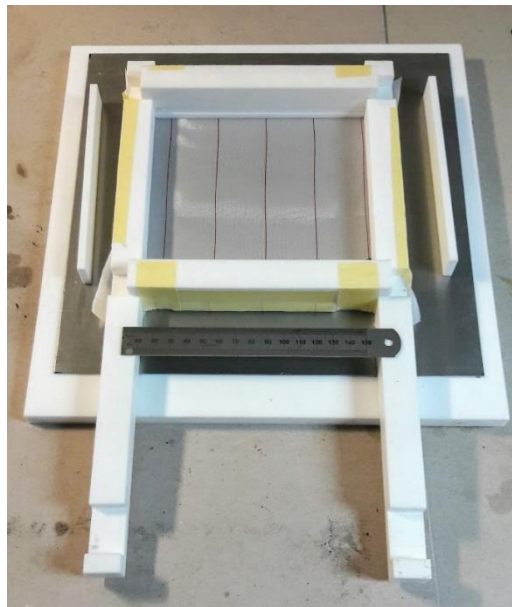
modified PTFE assembly mould with peel-ply as the transpiring bottom.
